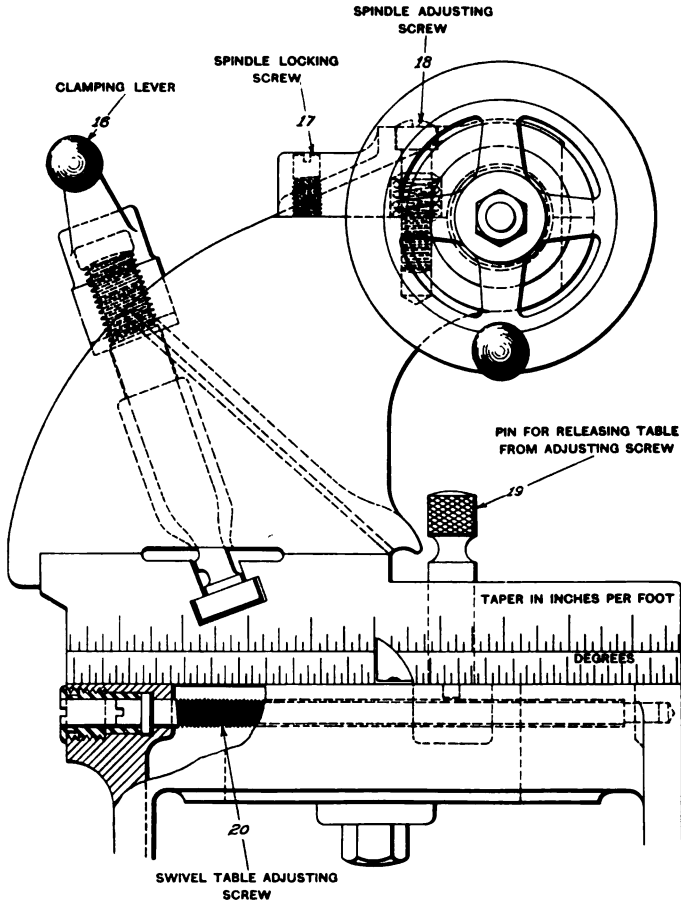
End View Footstock and Table—Small and Medium Size Universal and Plain Machines
